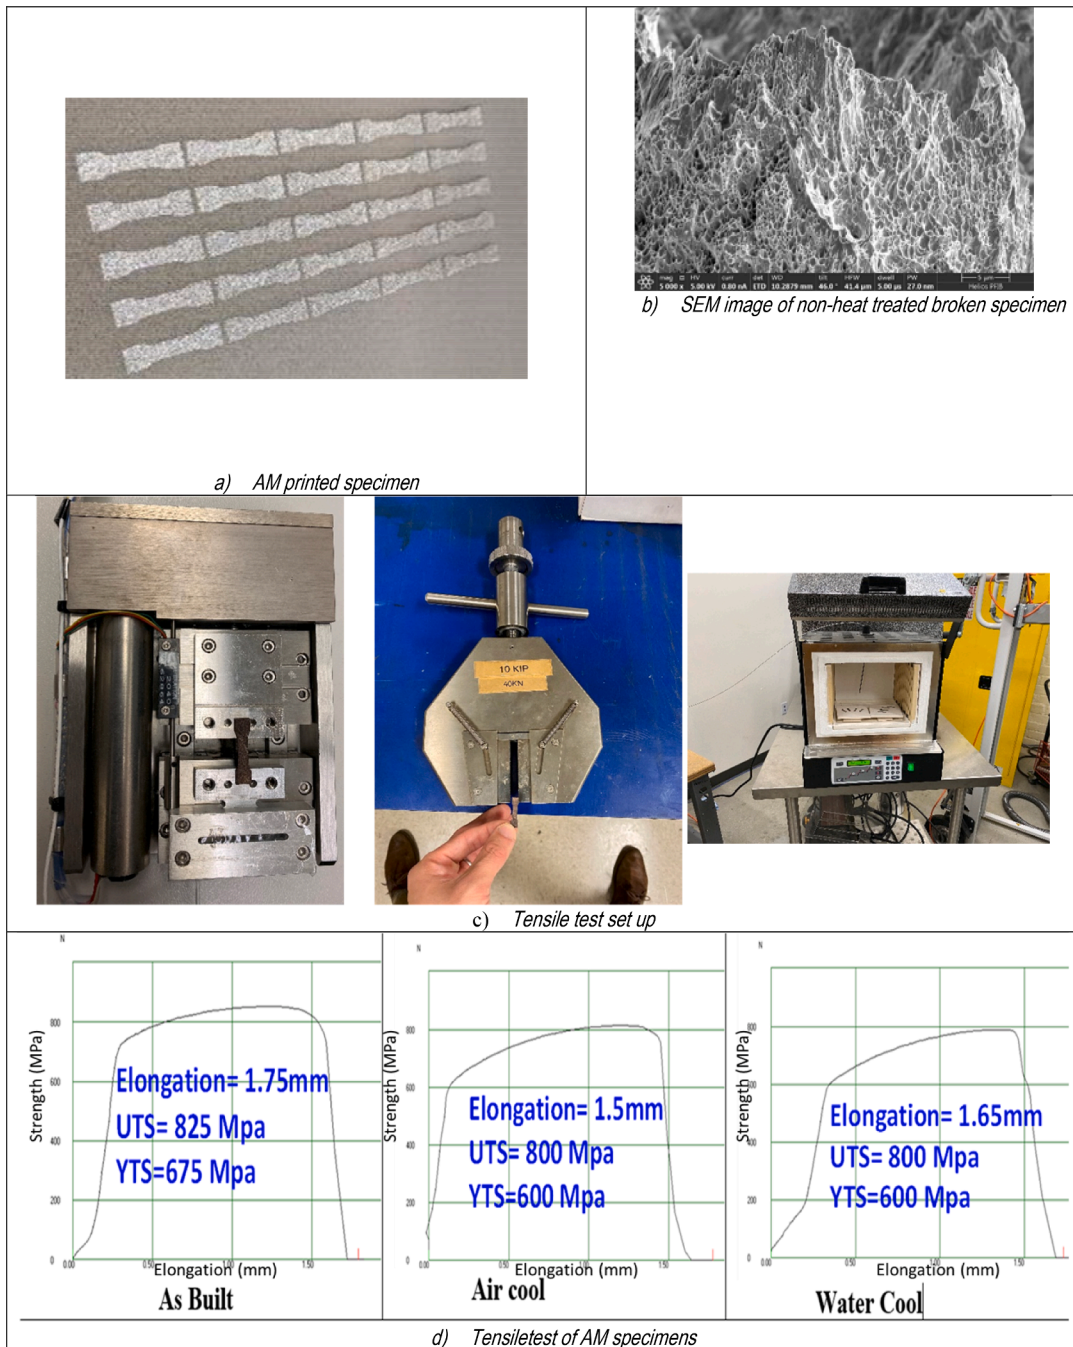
GE AM print of SS-316 steel specimen, tensile test, and NDE
